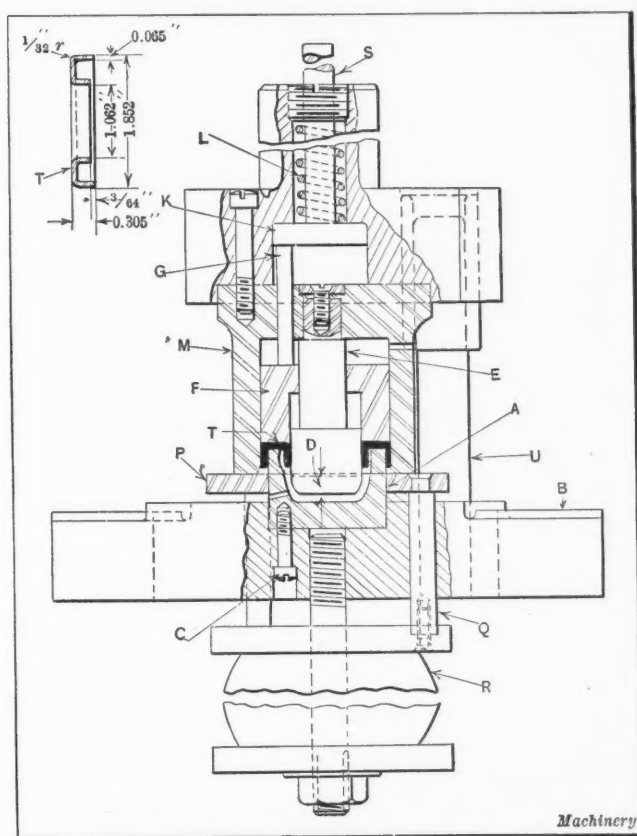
Forming Die for Second Operation on Bearing Adapters
